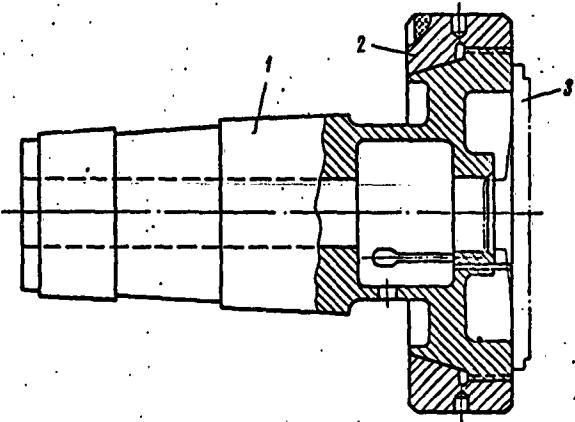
Mandrel for boring ball-bearing holes and lock in cover. 1) Expansion mandrel; 2) nut; 3) cover.
